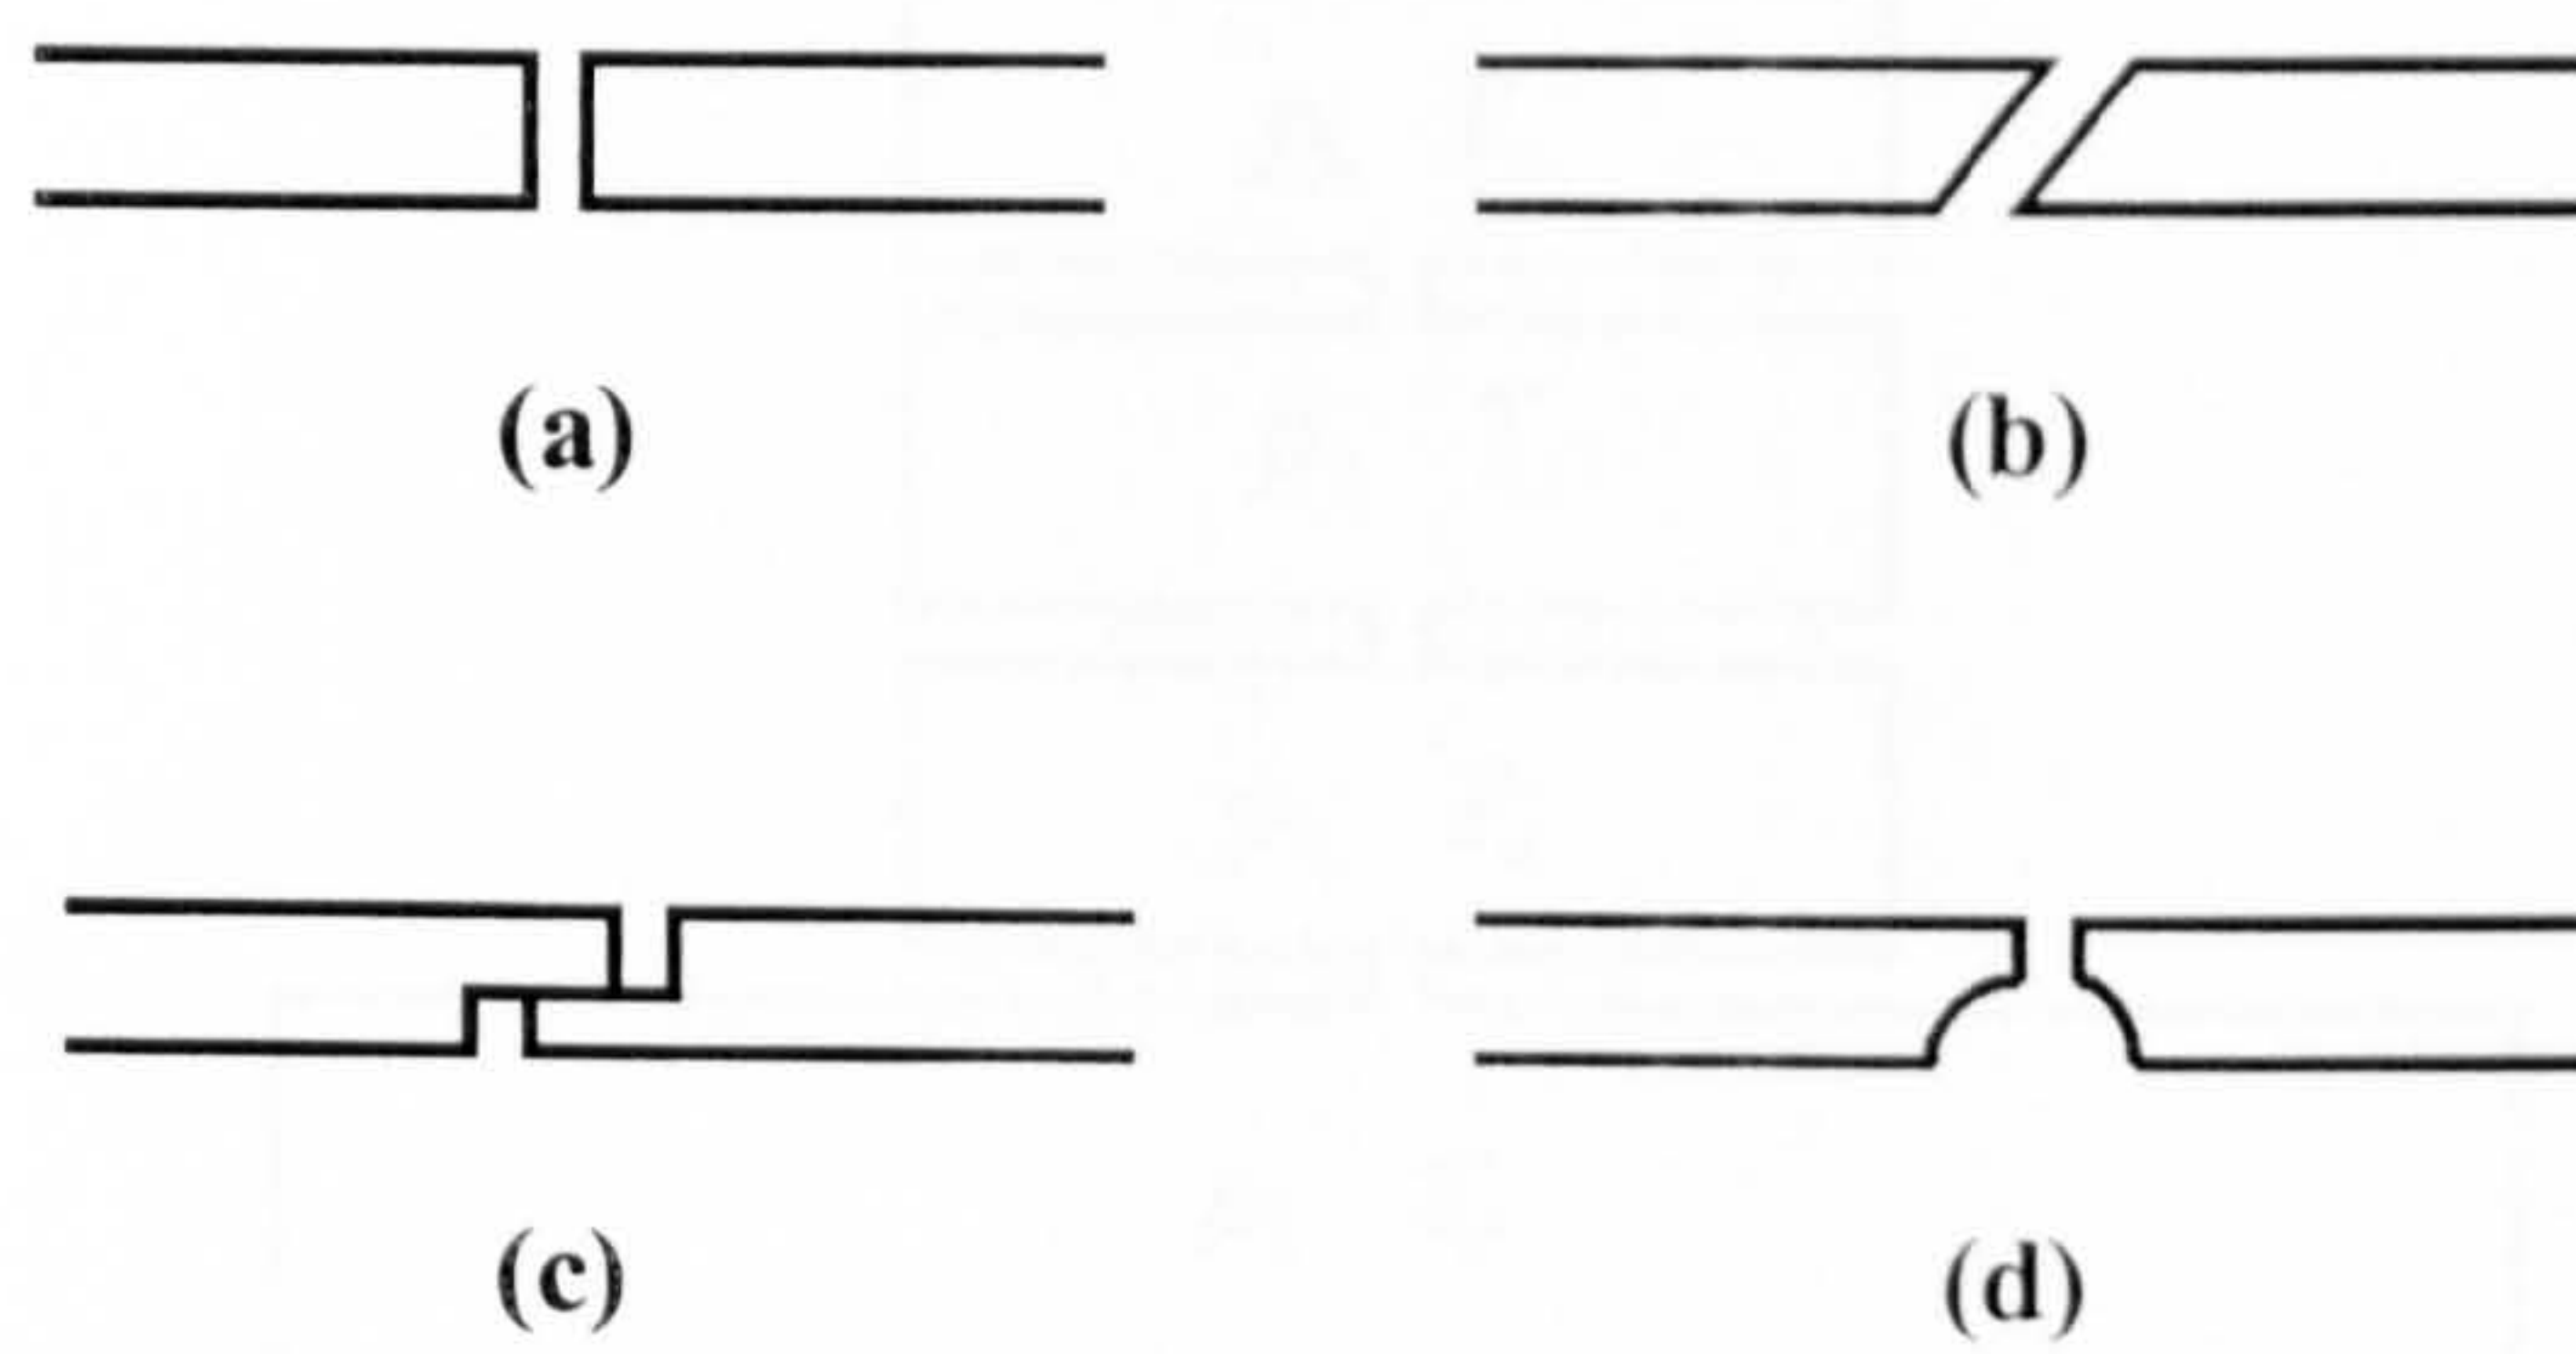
A few typical shapes of ring-gaps used in reciprocating engines.
